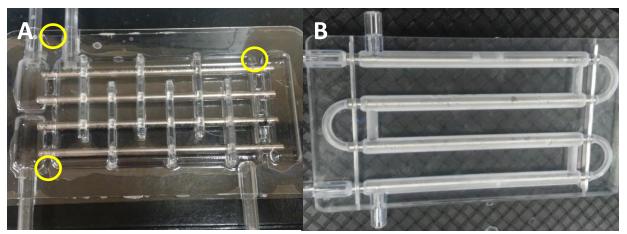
A) Shell and tube heat exchanger assembled with vacuum-formed parts and two-part epoxy with leaky, problem areas circled in yellow; and B) double pipe heat exchanger assembled with injection molded parts and UV-cured adhesive.
